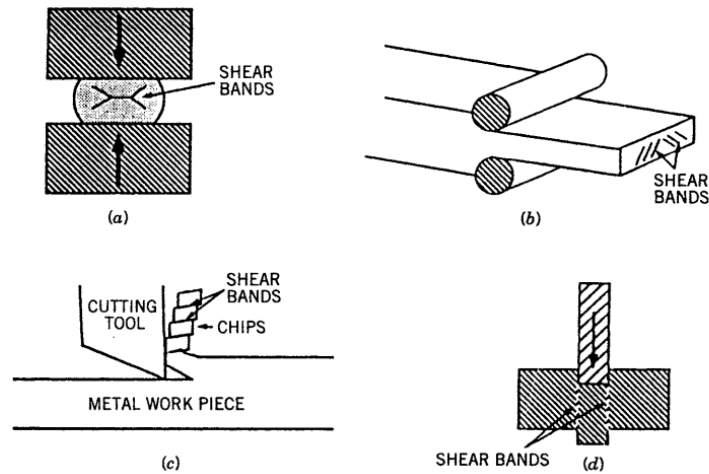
Shear localization in plastic-forming processes: (a) upset forging; (b) rolling; (machining); (d) punching and shearing. [14]
